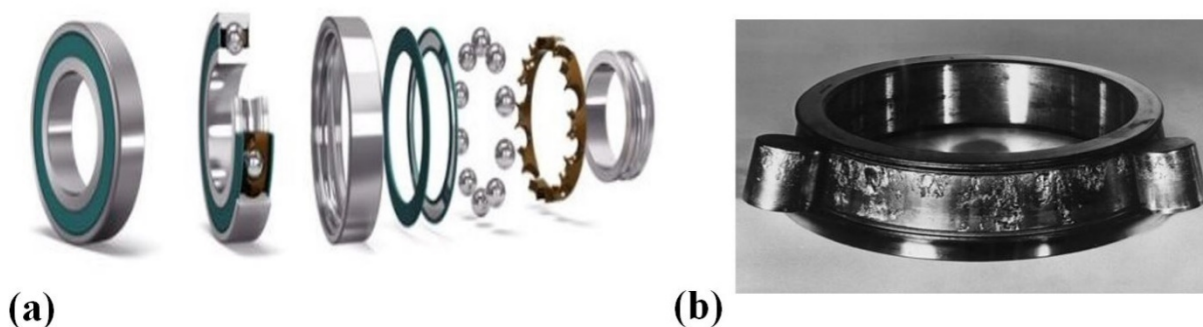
(a) Exploded view of bearing (b) Assembled bearing[3][4].
